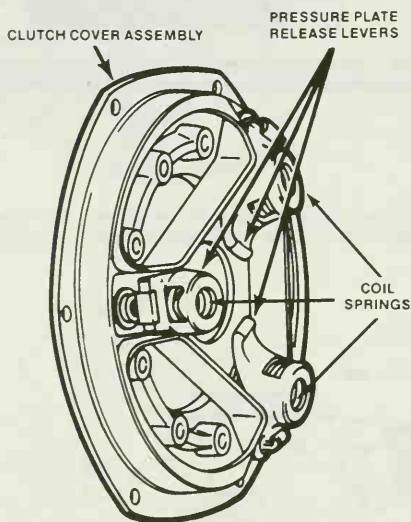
A coil spring pressure plate assembly with three coil springs. (American Motors Corporation)
